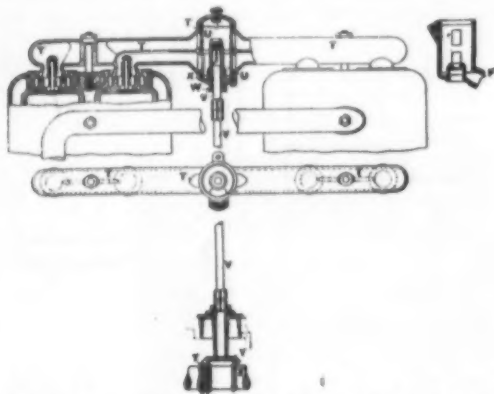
SHOWING ARRANGEMENT IN SIDE ELEVATION, END ELEVATION, AND PLAN OF THE DISTRIBUTION VALVE MECHANISM AND CONNECTIONS.
